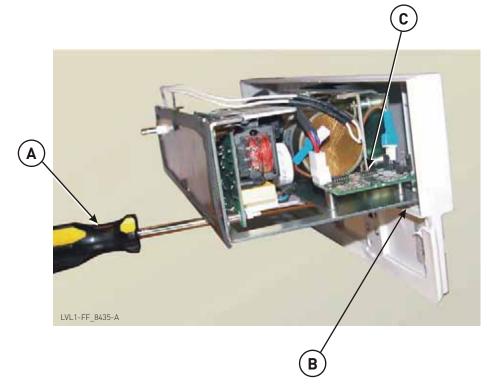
41: Re-attaching the left-hand Side Support Plate
